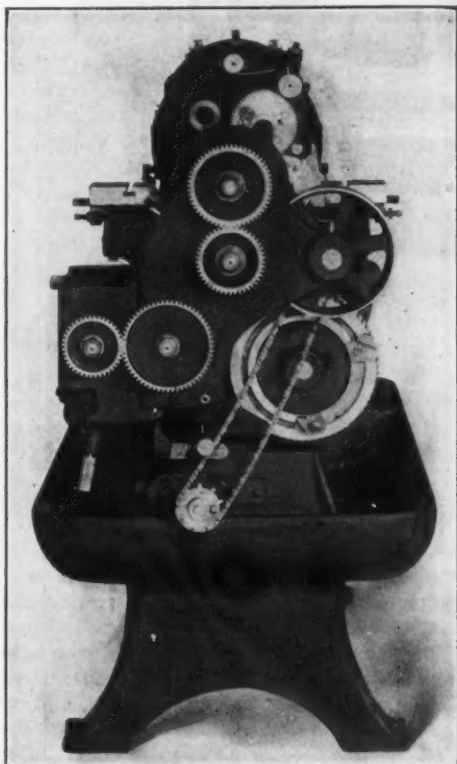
A View of the Tail End of the Peerless Screw Machine.
